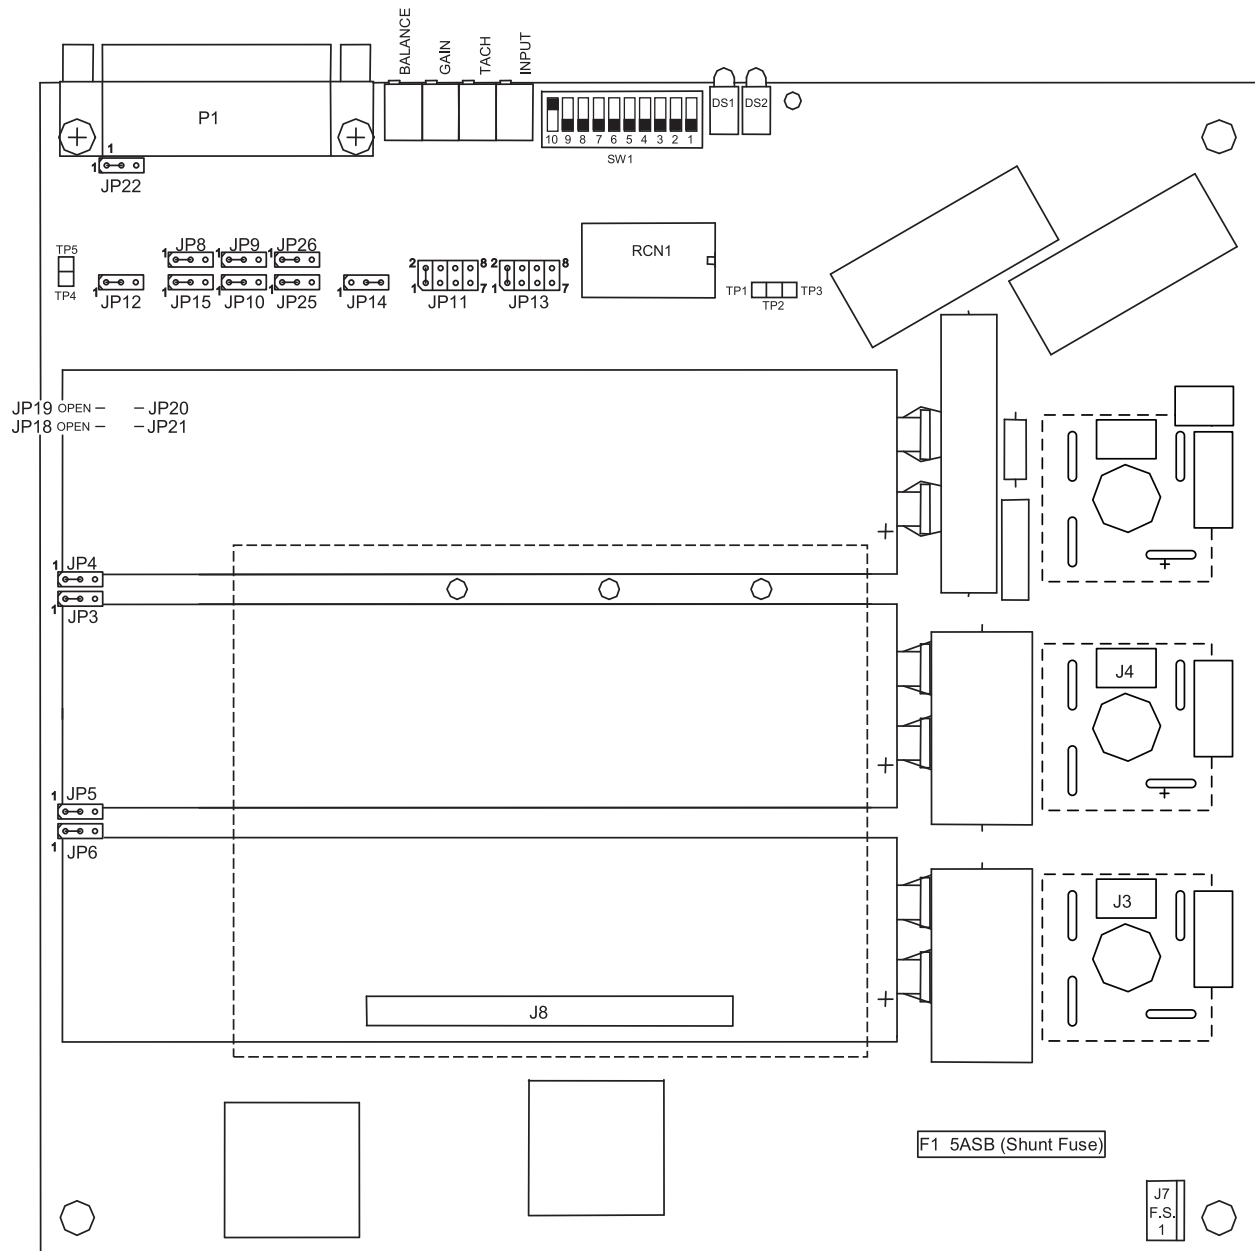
BA50/75/100 Board Assembly (Jumpers Shown in Default)
